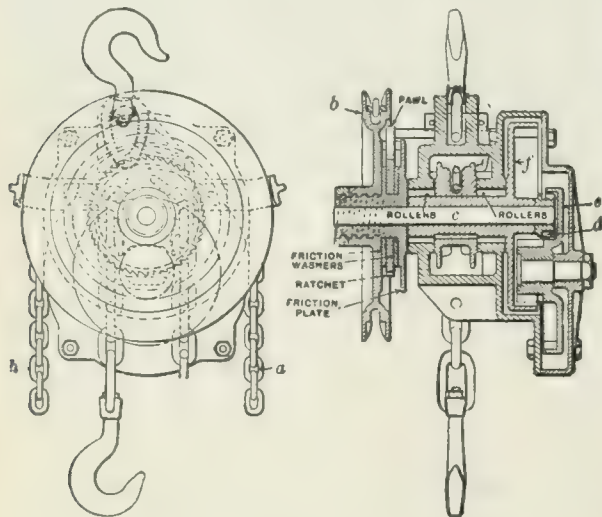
End View and Axial Section of the Climax Spur Geared Hoist.
